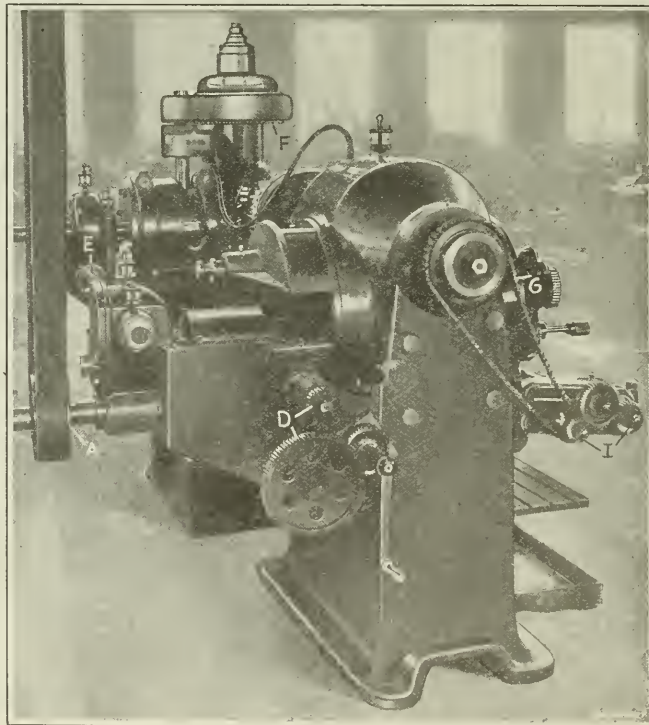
End View of Machine set up for hobbing Worm-wheels
